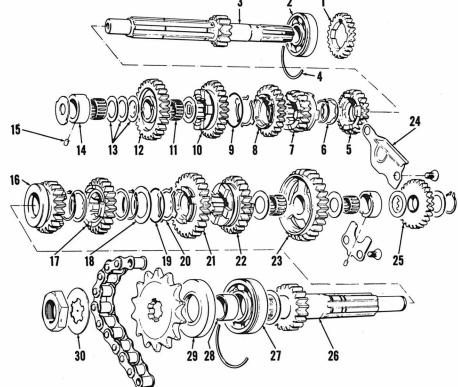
Exploded view of transmission assembly used in 250 and 350cc models. Unit in 305 is similar.
